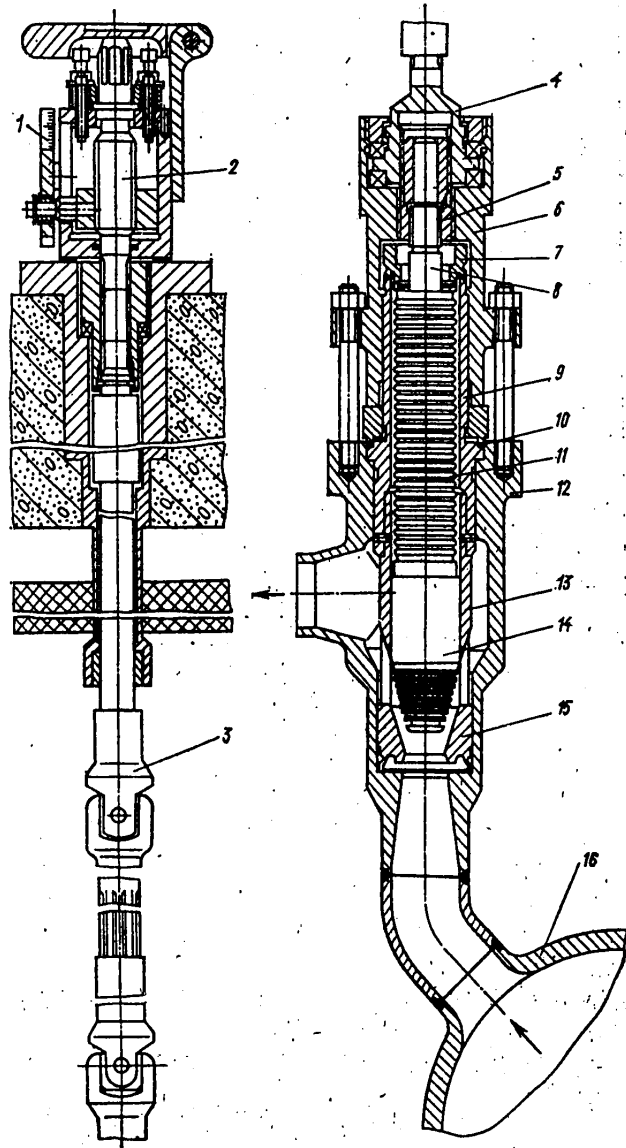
Shutoff-Regulating Valve: 1--indicator; 2--indicator screw; 3--drive; 4--drive shank; 5--threaded sleeve; 6--connector; 7--ring; 8--shaft; 9--sleeve; 10--gasket; 11--bellows; 12--housing; 13--throttle valve; 14--end piece; 15--throttle valve seat; 16--group collector
